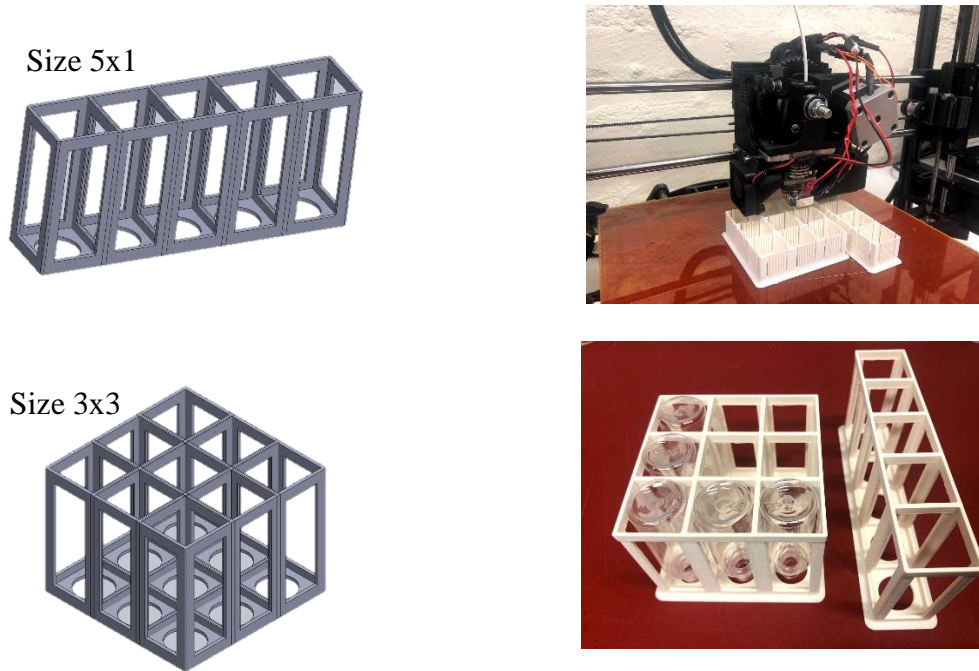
CAD Model, 3-D Printing and Printed Model with some bottles in upside position
